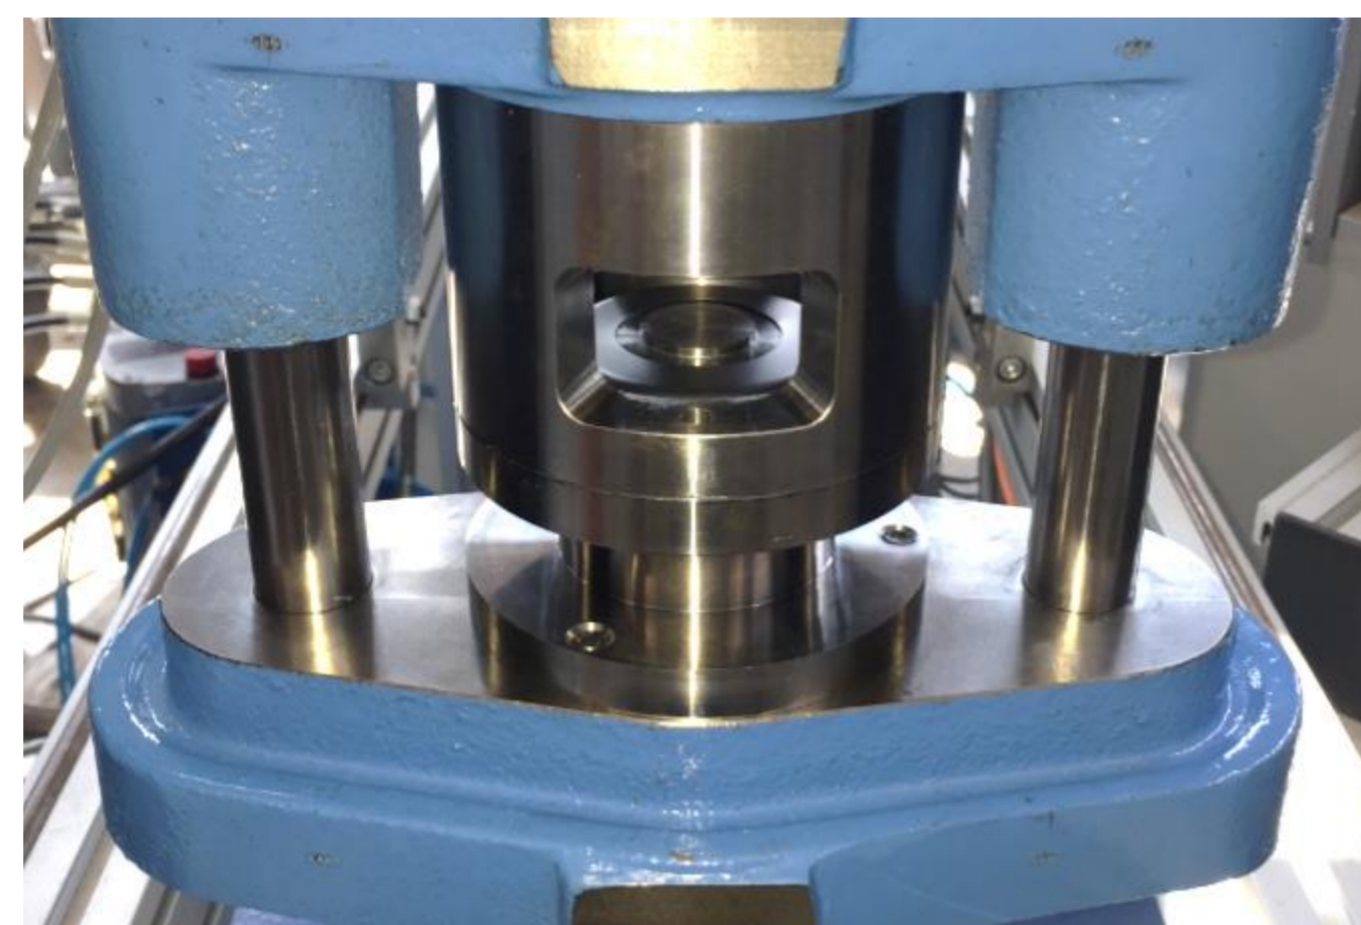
Experimental setup of HET conducted with mechanical testing machine TIRAtest 28100
